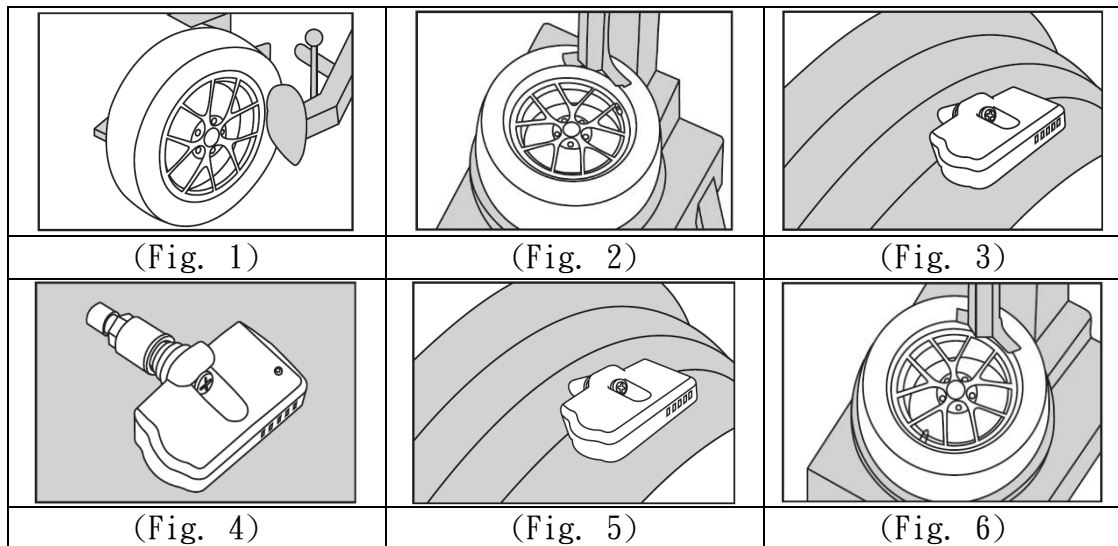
Install valve to the rim hole. Guide the washer into the valve, and fix the nut by 4 Nm in torque, then tighten the cap.
